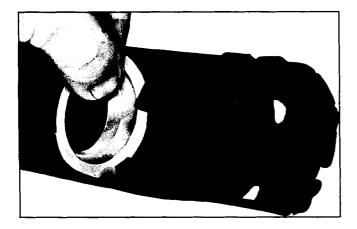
Removing or Installing Lower Shift Bowl Bearing
